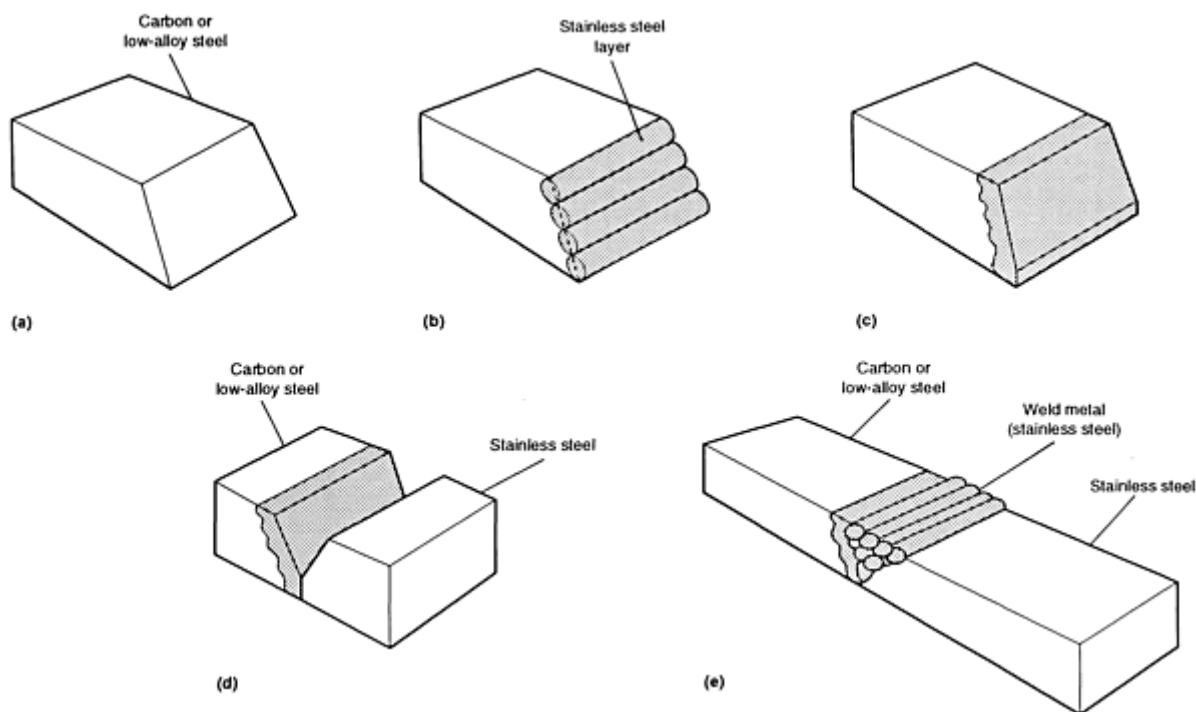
BUTTERING TECHNIQUE USED TO ASSIST WELDING STAINLESS STEEL TO CARBON OR LOW-ALLOY STEEL. (A) EDGE PREPARED FOR BUTTERING. (B) FACE BUTTERED WITH FILLER METAL. (C) BUTTERED FACE PREPARED FOR WELDING. (D) JOINT ALIGNED FOR WELDING. (E) JOINT WELDED WITH STAINLESS STEEL FILLER METAL. SOURCE: REF 33
